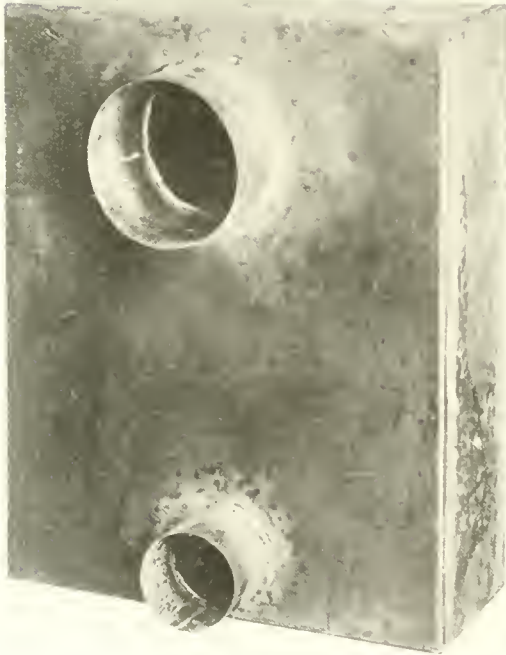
Gauge heater electrically welded. This is a good example of welding in light sheet steel.
